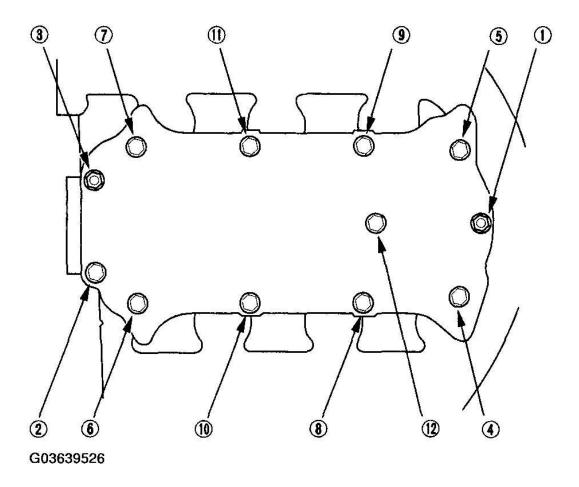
Removing Upper Cover Mounting Bolts And Nuts In Sequence Courtesy of AMERICAN HONDA MOTOR CO., INC.
